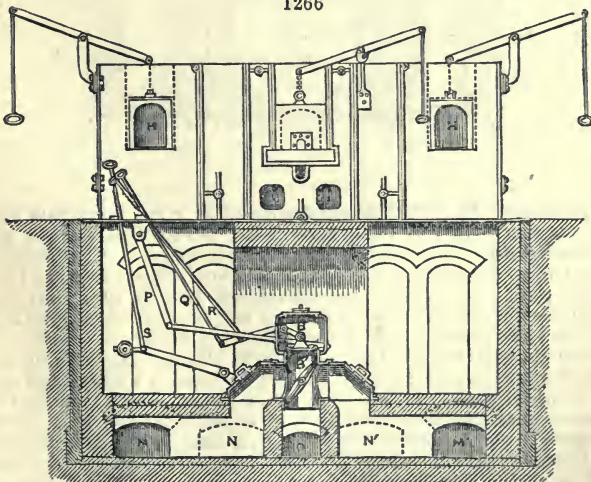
is a front elevation of the furnace, showing the gas reversing valve and flues in section.
